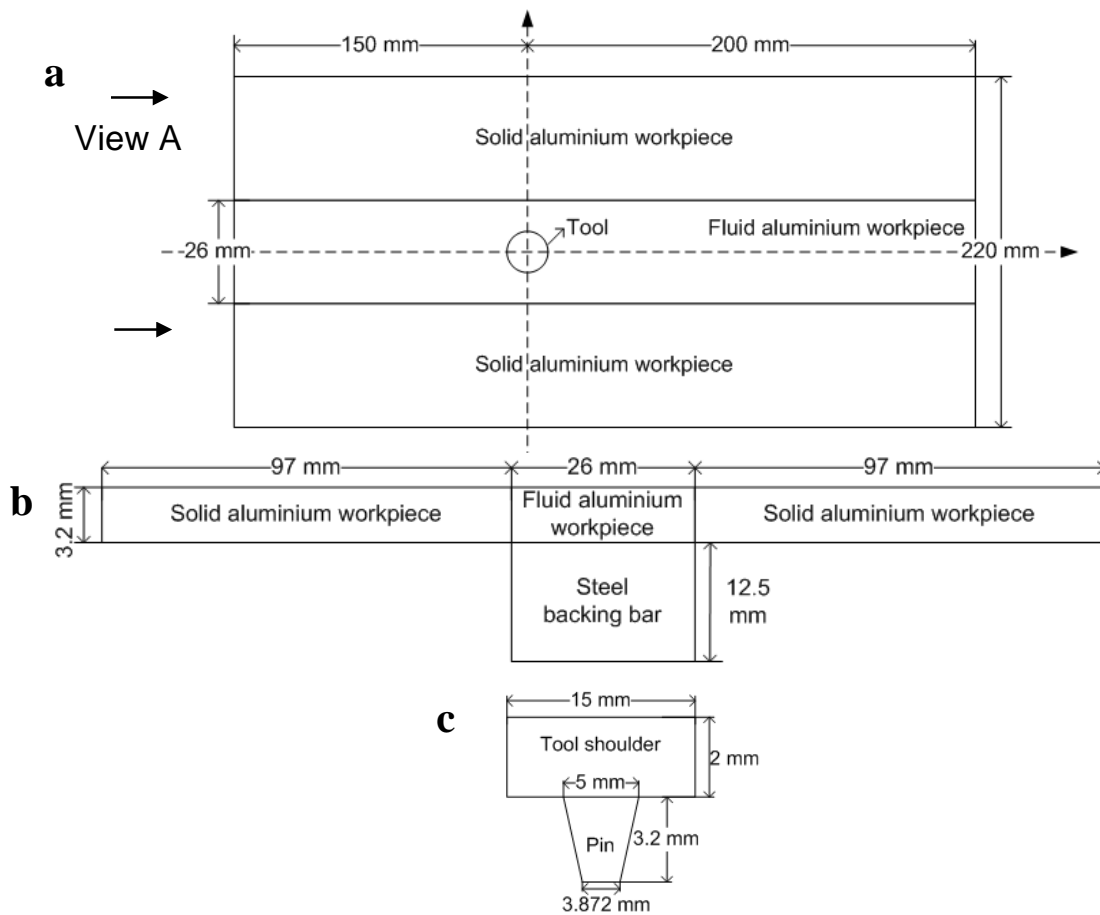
Diagram of the geometry used for the FLUENT model: a) top-view and b) end view (view A from (a)) and c) the welding tool
